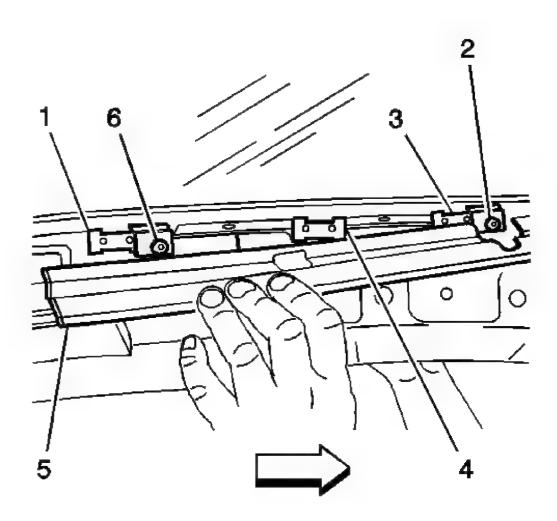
Identifying Sunroof Panel Side Opening Closeout Panel Cover Courtesy of GENERAL MOTORS CORP.
